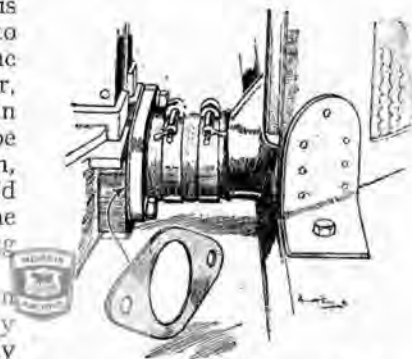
When re-making the lower water joint, after the radiator has been removed, replace the washer very carefully.
